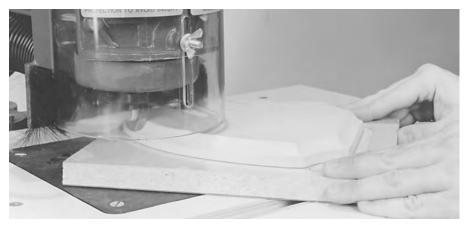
By changing to an edge cutting bit, you can use your fixture to shape the edges of a workpiece after it is cut out.
